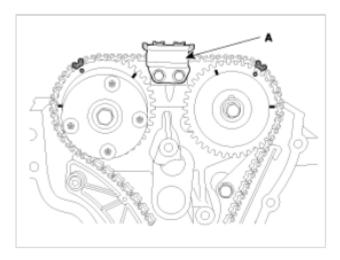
Locating Tensioner Arm Assembly And Idler Courtesy of HYUNDAI MOTOR CO.
